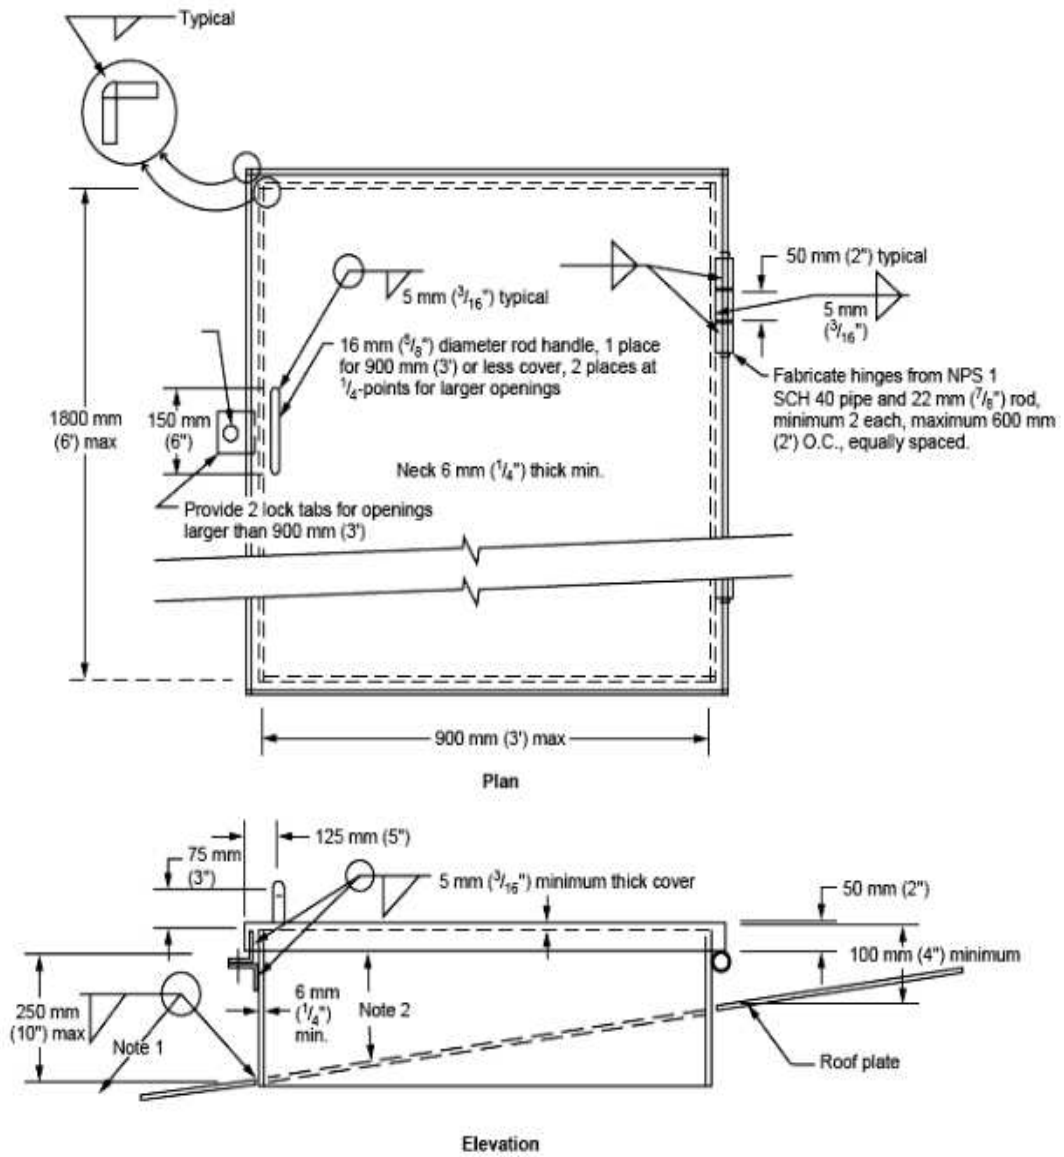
Rectangular Roof Openings with Flanged Covers
